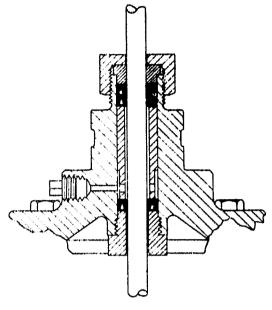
Detail of Packing Gland with Upper and Lower U-Cups and Spacer
